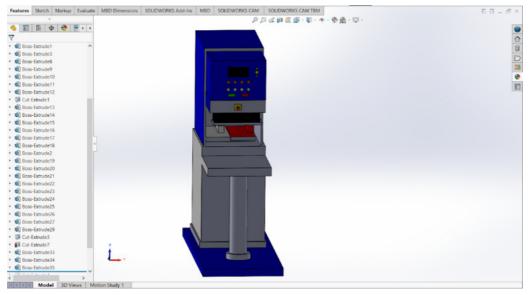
Modelled pad printing machine in SOLIDWORKS 2022.
